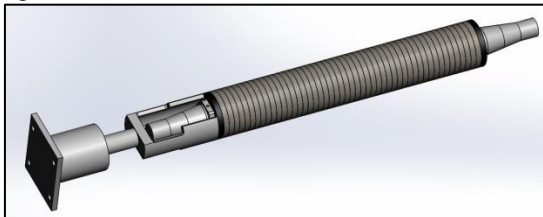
CAD Model of composite shaft with Pressing arm
